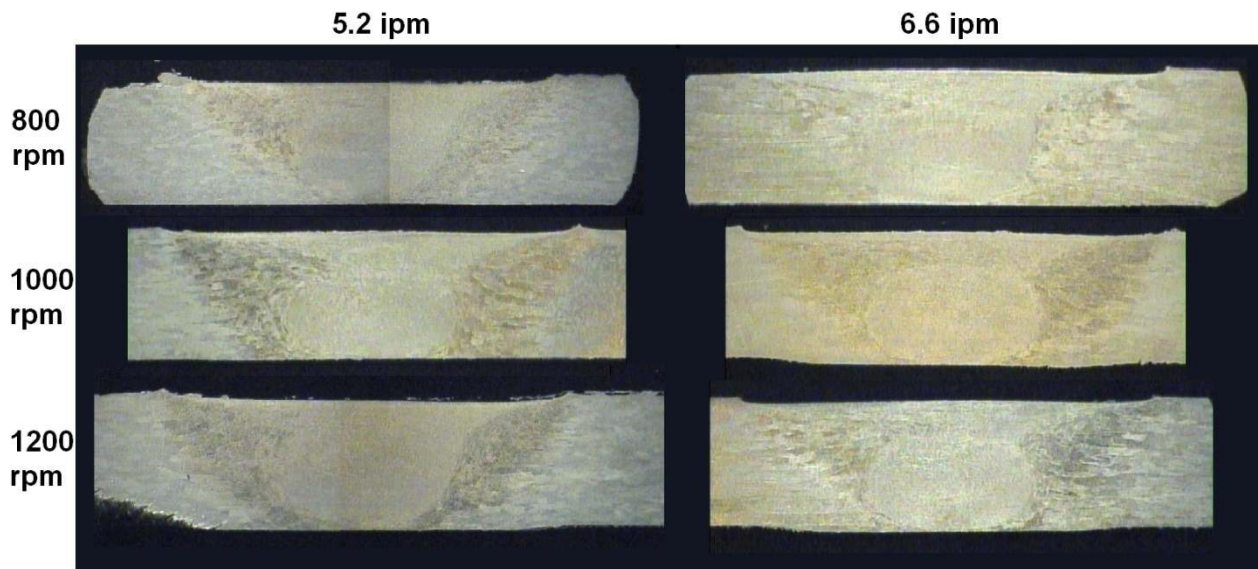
Lateral macrosection view of welds made at 5.2 and 6.6ipm using a 5/8" dia. scrolled shoulder, 3/16" dia. threaded probe tool. Two of the weld images presented above were made by composition of two photos due to an equipment issue.
